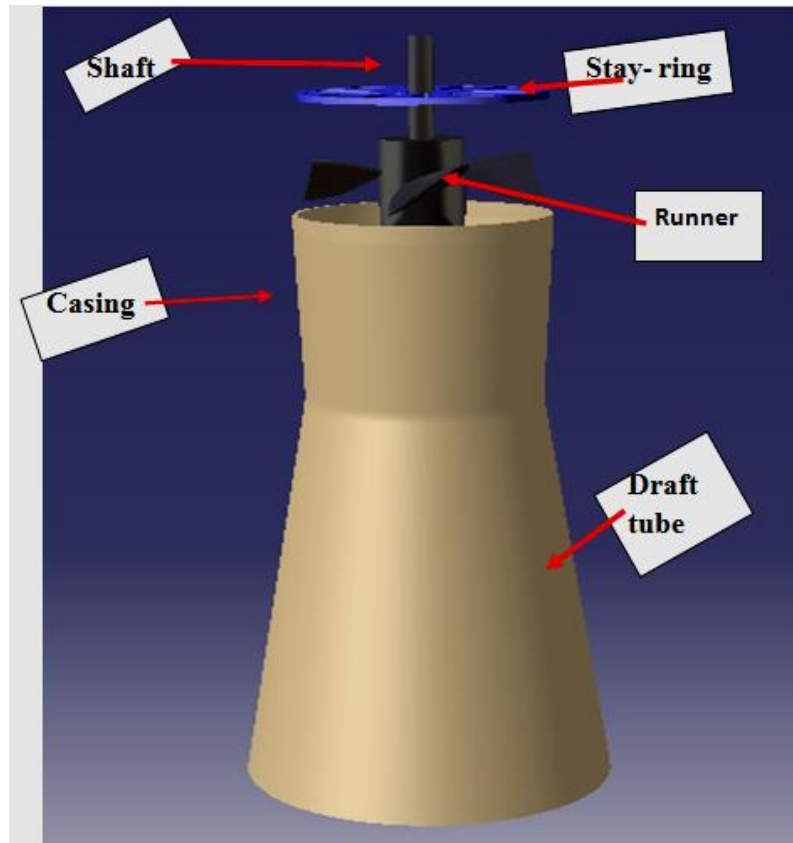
3D CAD model geometry of runner and its draft tube
